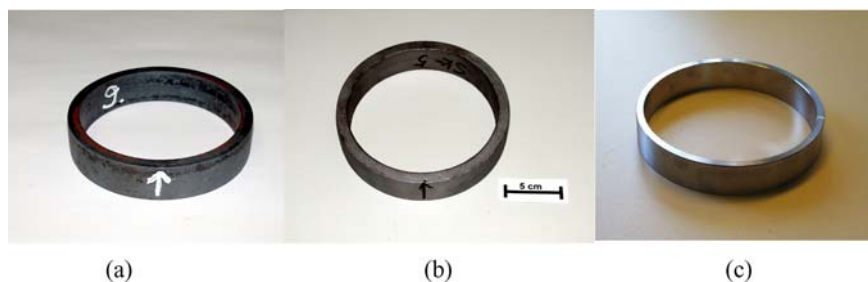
Rings made from spray formed 100Cr6 steel after (a) annealing, (b) sand blasting and (c) machining.
